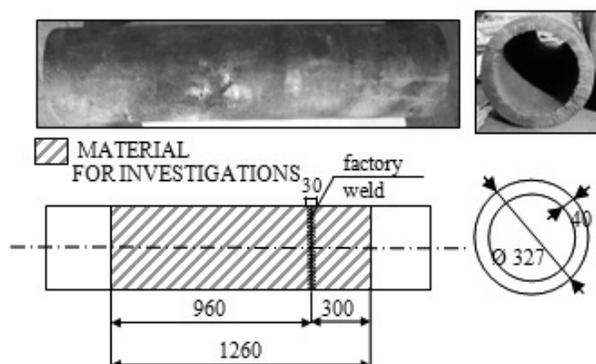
Material for investigations in the form of 14MoV63 steel homogeneous circumferential welded joint of primary steam pipeline elbow shell after 200,000h service
